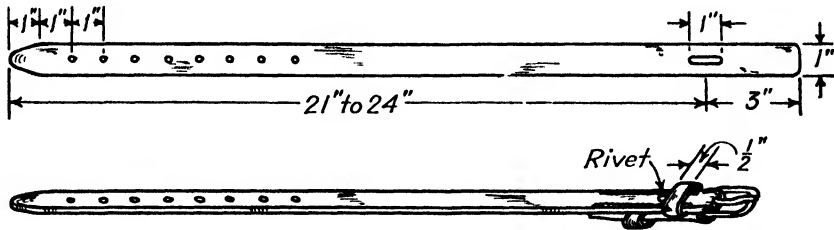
A homemade belt or strap. The buckle is attached by sewing and riveting.
